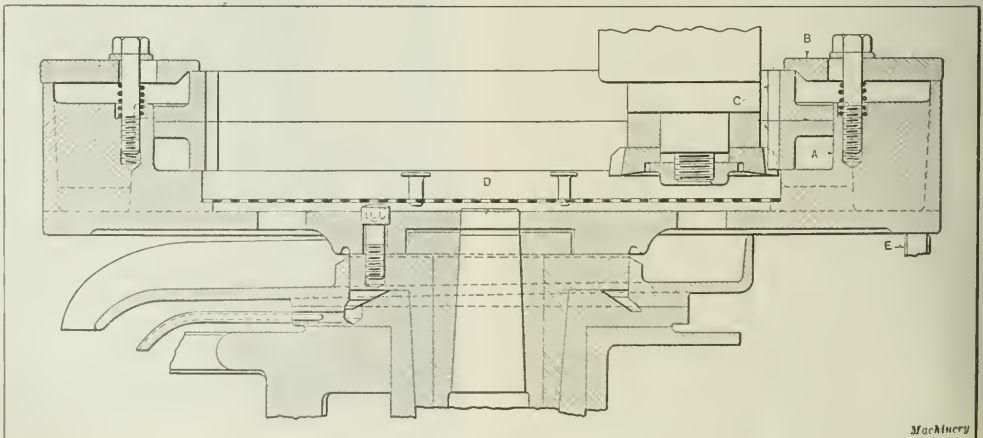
Fixture for holding Internal Gears while cutting on a Gear Shaper
